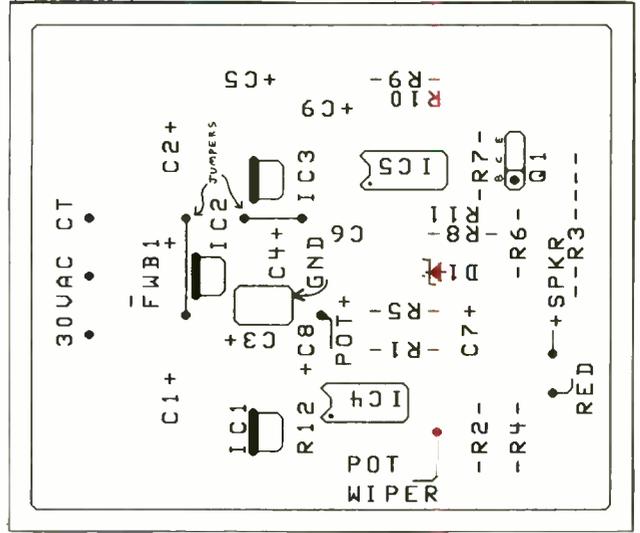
Wiring diagram for printed-circuit board. Note the two wire jumpers that must be installed.
